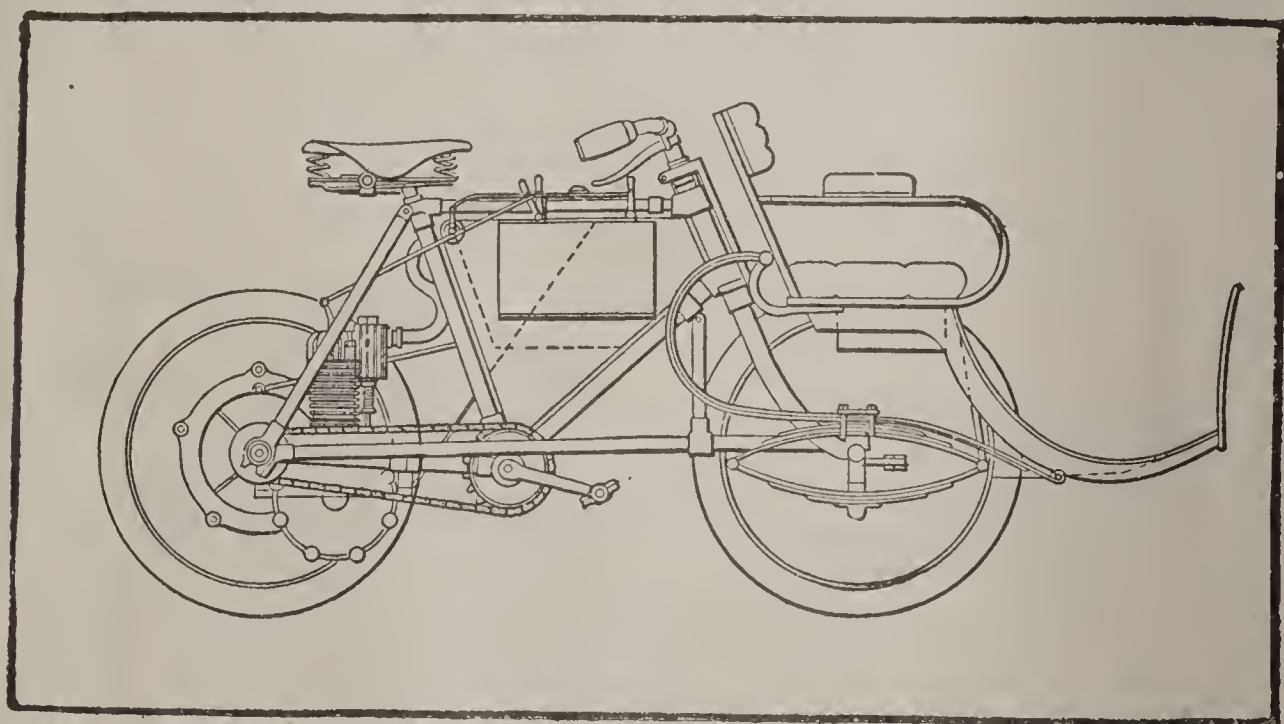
Motor Tricycle With Two Wheel Fore Carriage to Carry Passenger.
